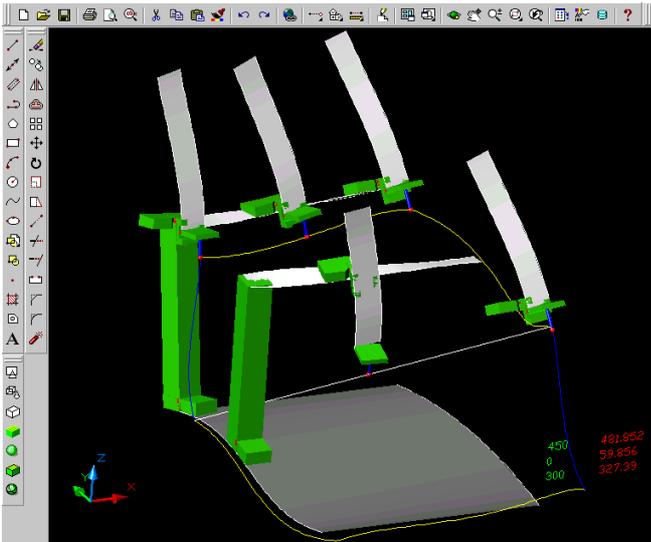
The machine built inside Autocad, calls functions of paths and assemblies, for both movements: linear and freeze axis.
